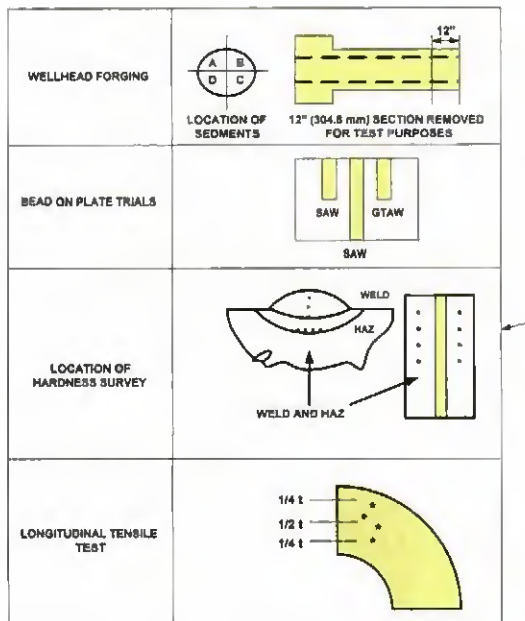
Location of tensile test and weld, HAZ, and forging hardness survey.
